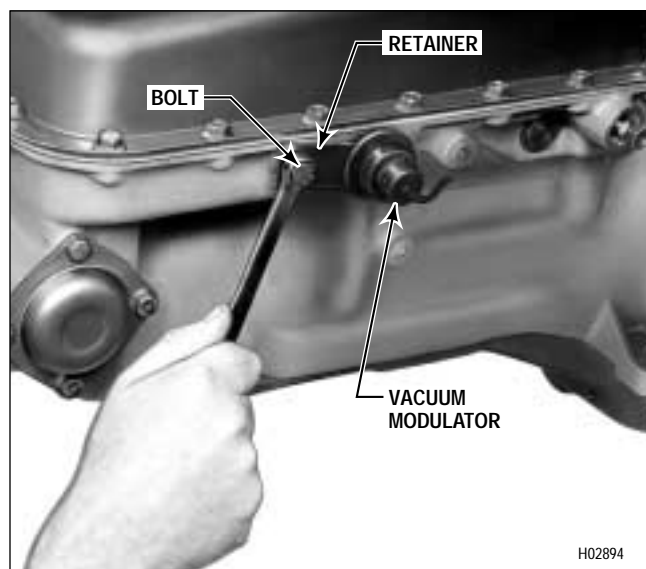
Installing Vacuum Modulator Retainer Bolt
